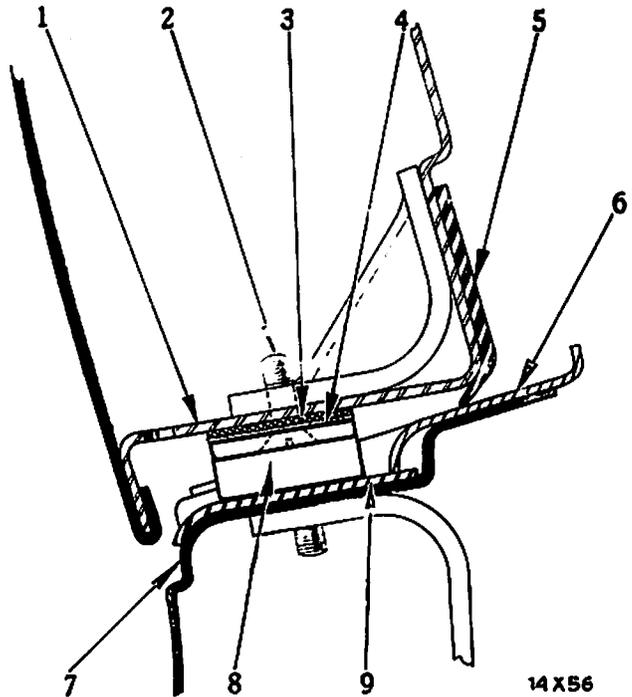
Cross Section Showing Installation of Door Lower Wedge and Striker Plate
